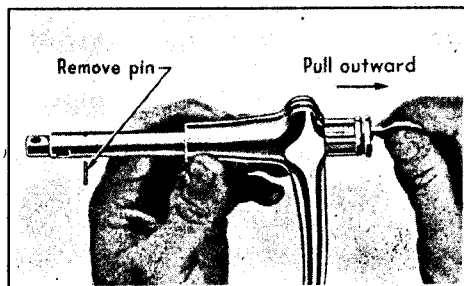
To remove a door handle lock cylinder, remove the retaining pin and pull the cylinder out with the key.
